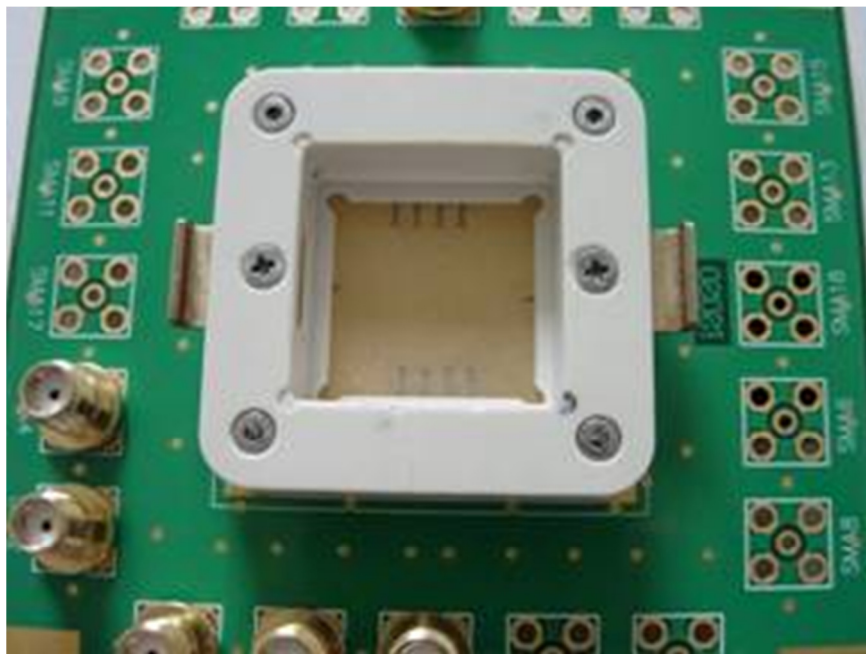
Elastomer Coplanar Contact probes inside test socket.
